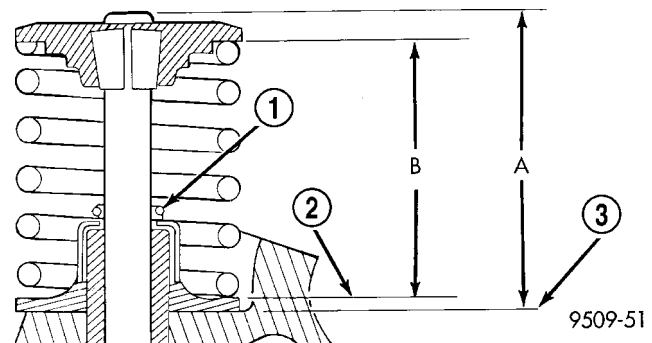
Checking Spring Installed Height and Valve Tip Height Dimensions
